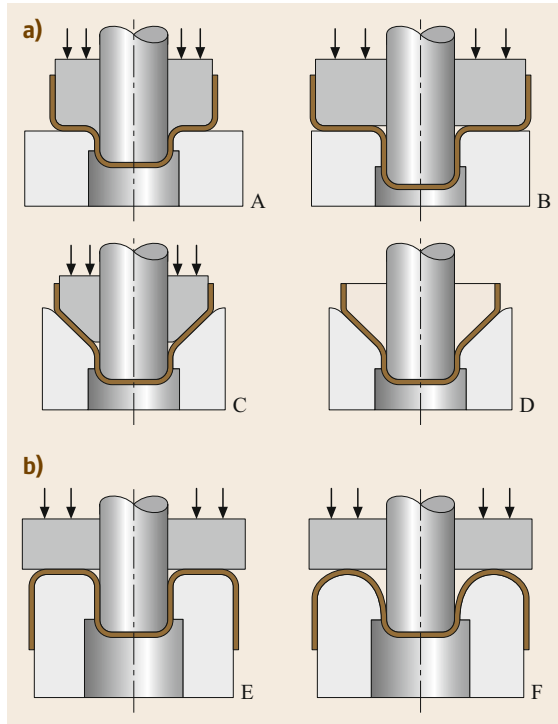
,b Redrawing process to increase the overall drawing ratio: (a) direct redrawing, (b) inverse redrawing
